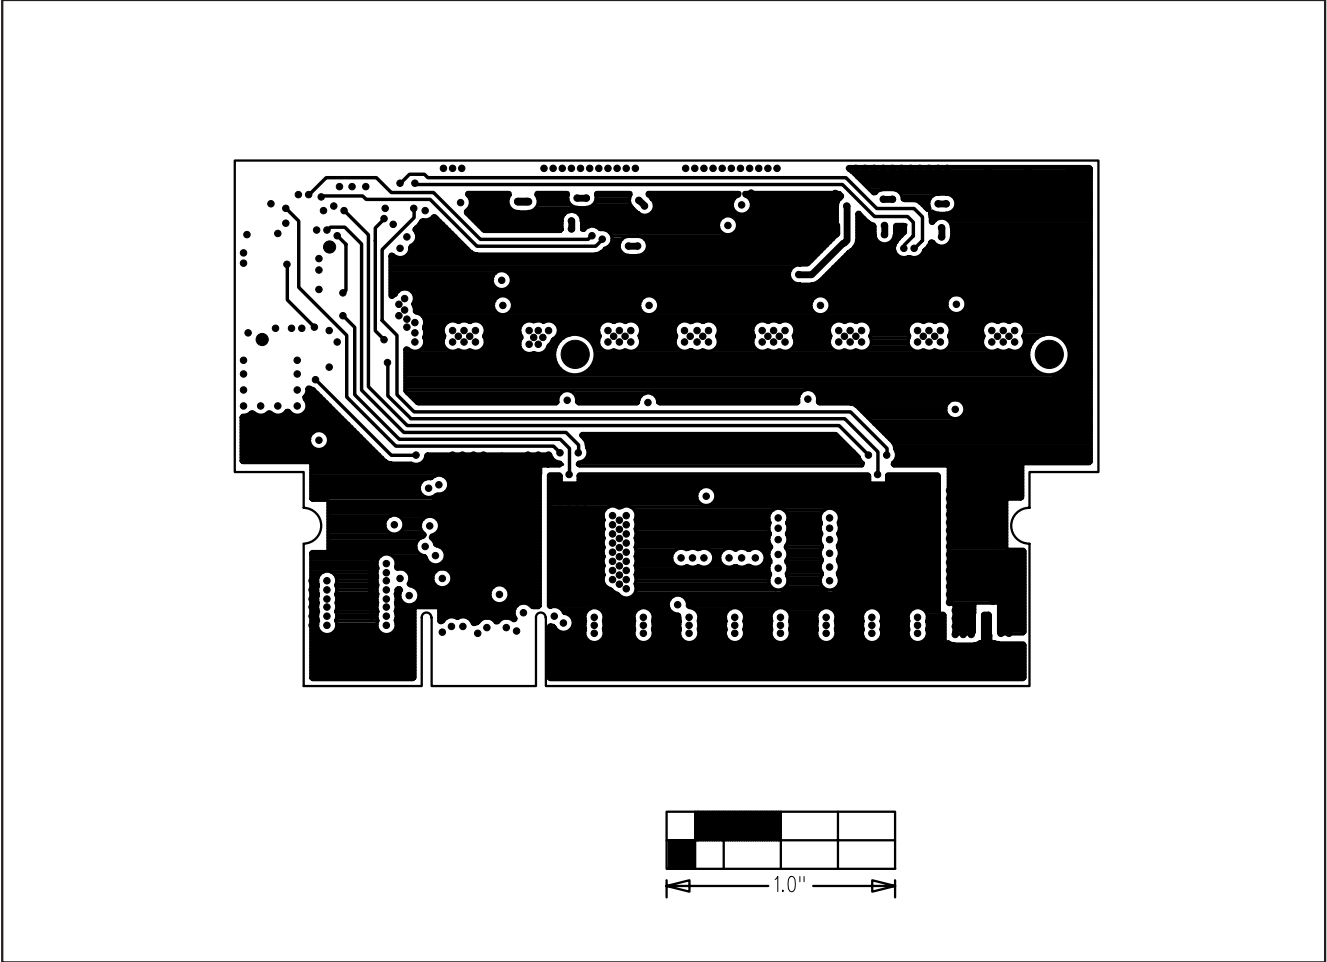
MAX8525 EV Kit PC Board Layout—SENSE/GND Layer 4
